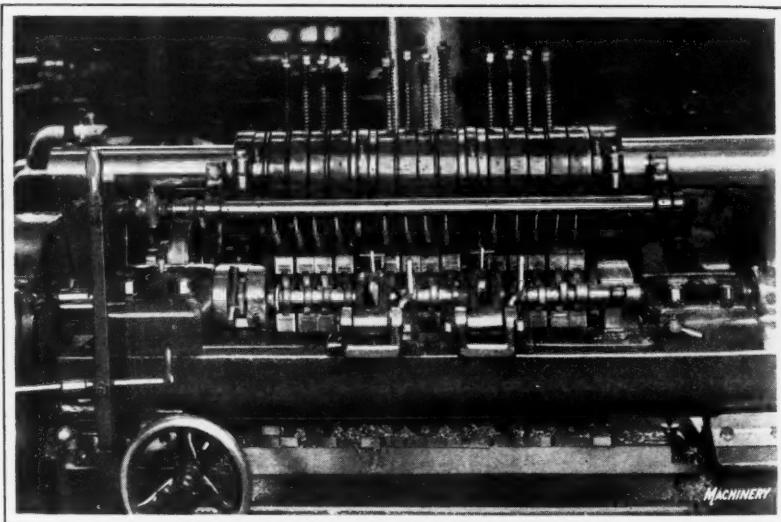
Turning Twelve Cam Risers and the Pump Eccentric on the Camshafts
